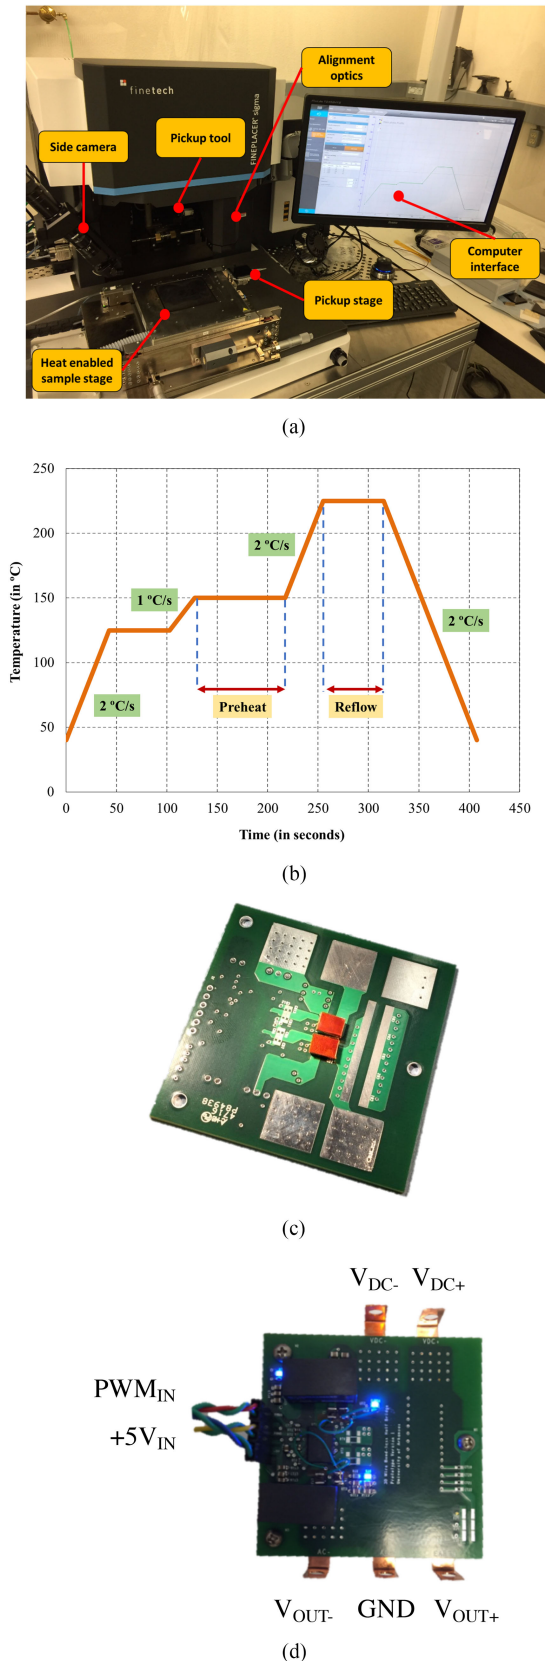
(a) Photograph showing the Finetech Fineplacer used for assembly. (b) Reflow profile used for the process. (c) Photograph of the bottom of the interposer showing the flip-chip MOSFET packages bonded to the interposer. (d) Photograph of top of the interposer showing the gate drive circuit in operating condition.
